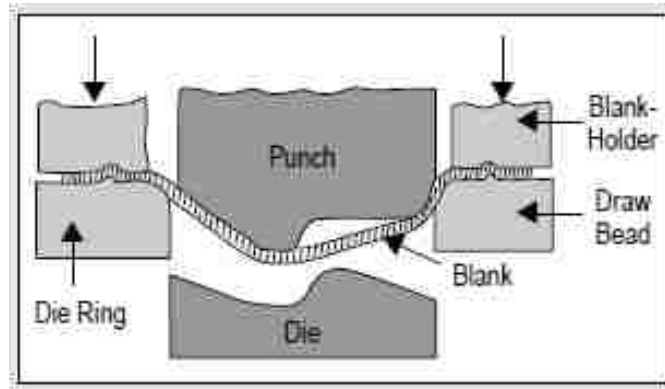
2: Schematic of the stamping process for the forming of sheet metal products [57].
